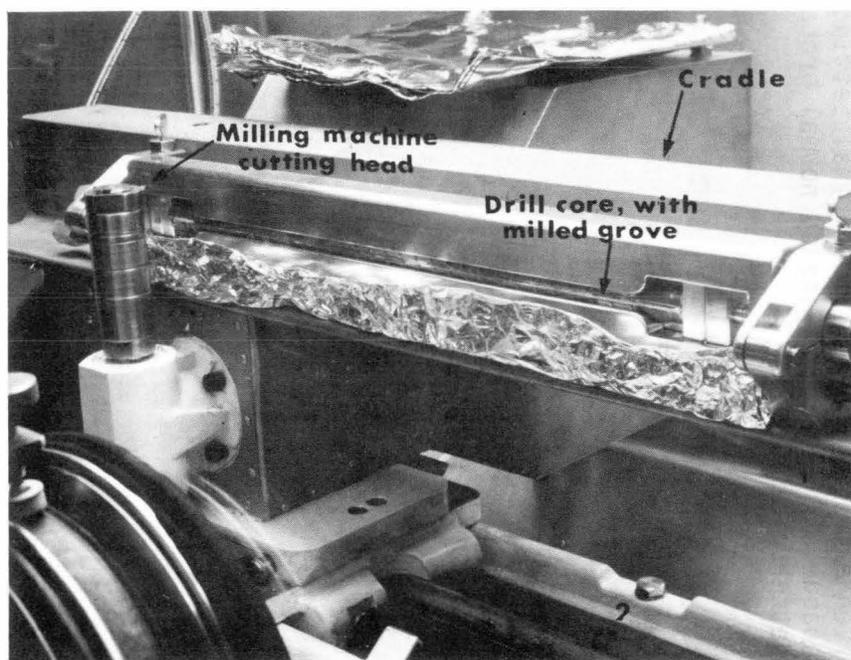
Milling machine within nitrogen cabinet with longitudinally split core tube held in clamping cradle.
